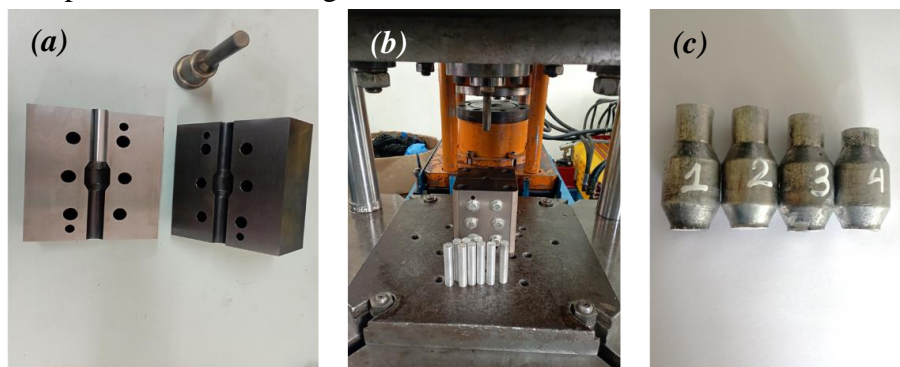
Deformation tools (a) and pressing device (b) of the CEE process; Deformed samples (c).
